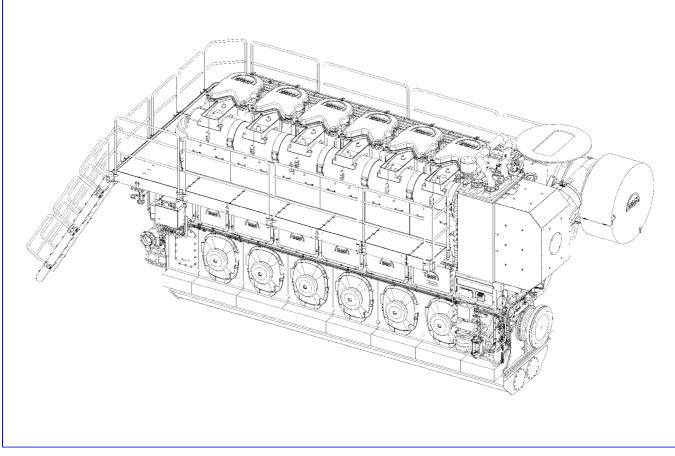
6-cylinder engine L 58/64 CD, viewed from the exhaust counter side
